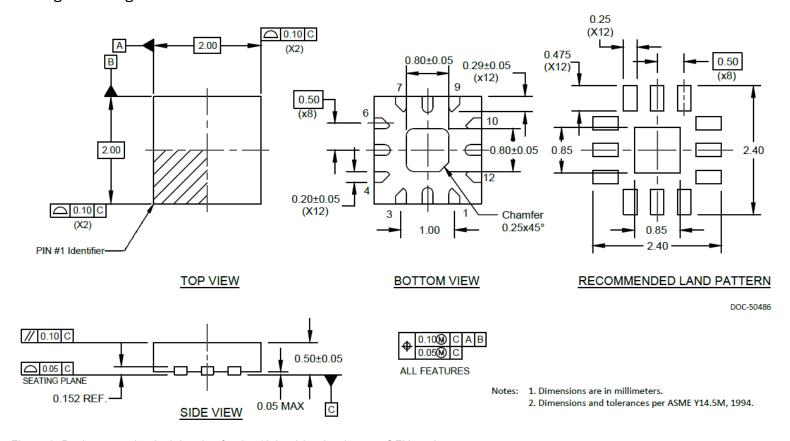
Package mechanical drawing for the 12-lead 2 × 2 × 0.5 mm QFN package
